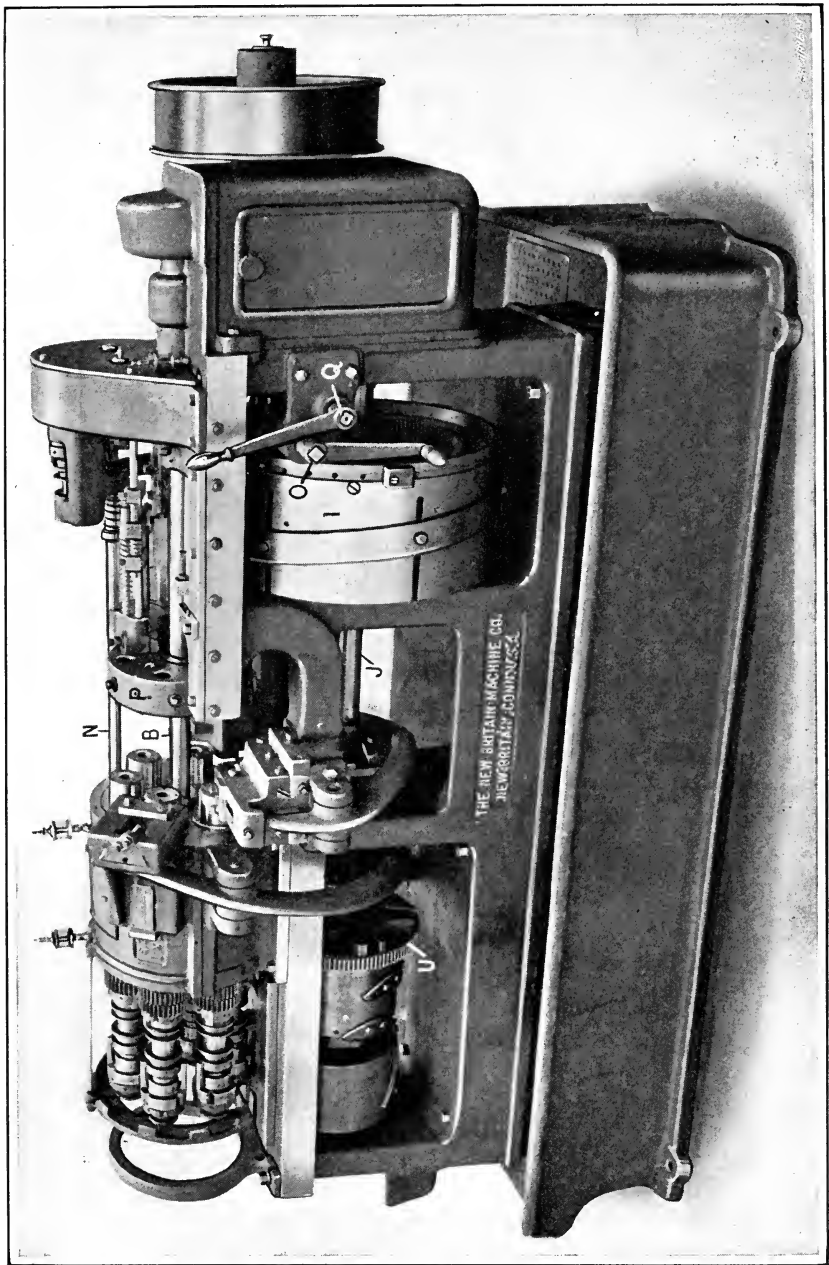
New Britain Six-spindle Automatic Screw Machine
